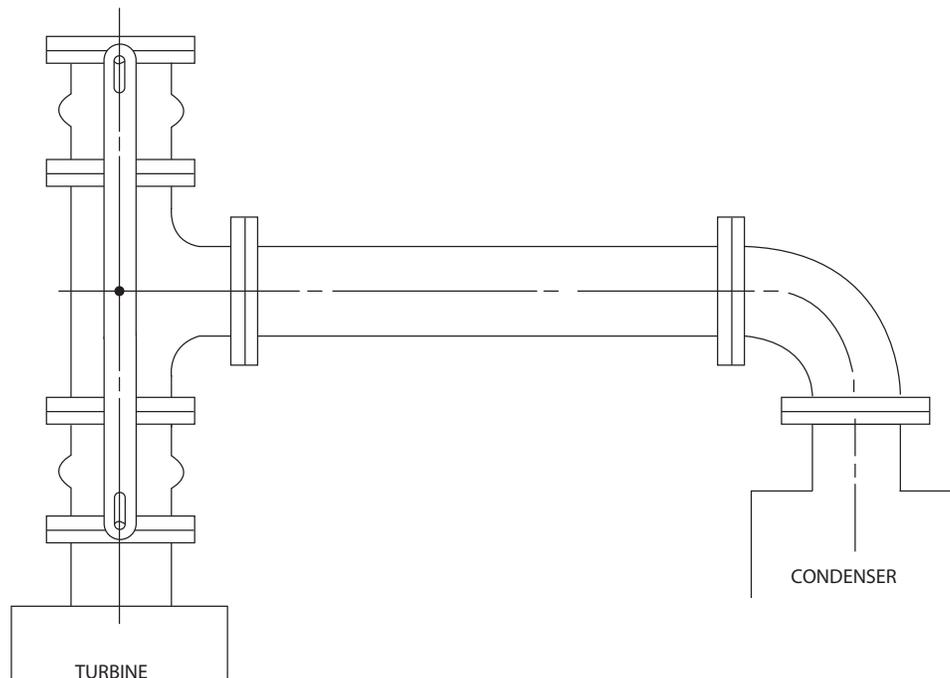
Condensing Turbine Expansion Joint with “UP” Exhaust
